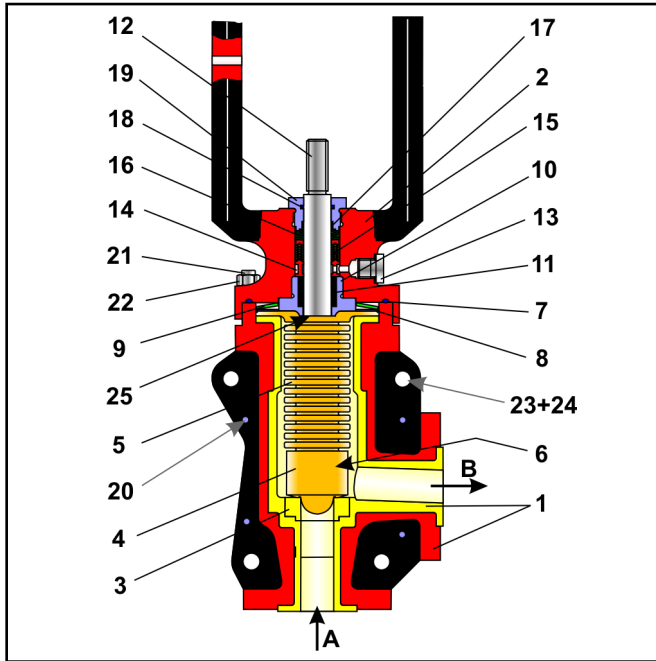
Sectional diagram of Series 8a Angle Valve
